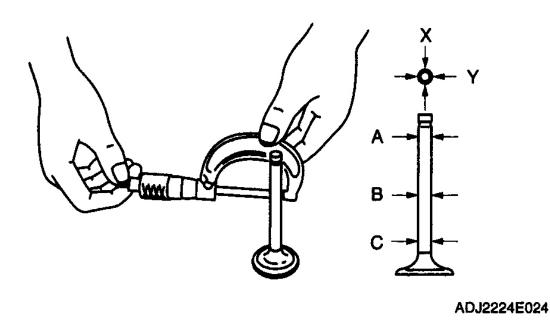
Measuring Stem Diameter Courtesy of MAZDA MOTORS CORP.
